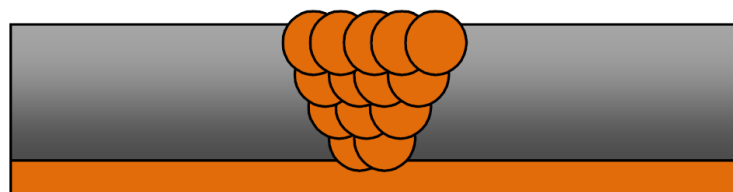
Opened hole filled by welding, chemical composition equivalent to internal clad/overlay
